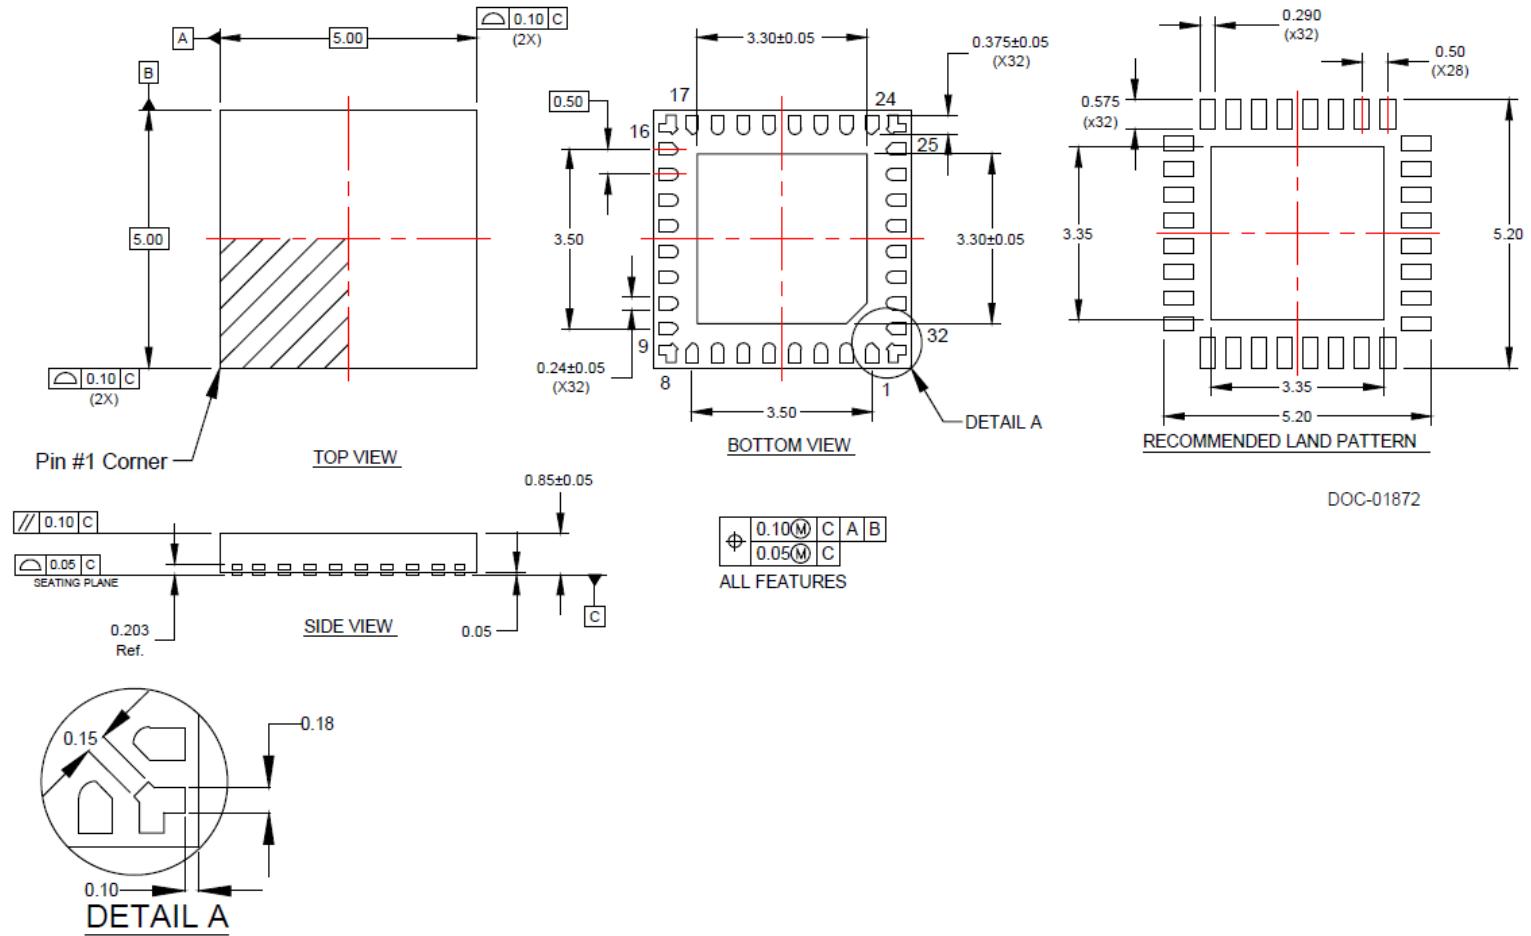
Package mechanical drawing for the 32-lead 5 × 5 mm QFN package
